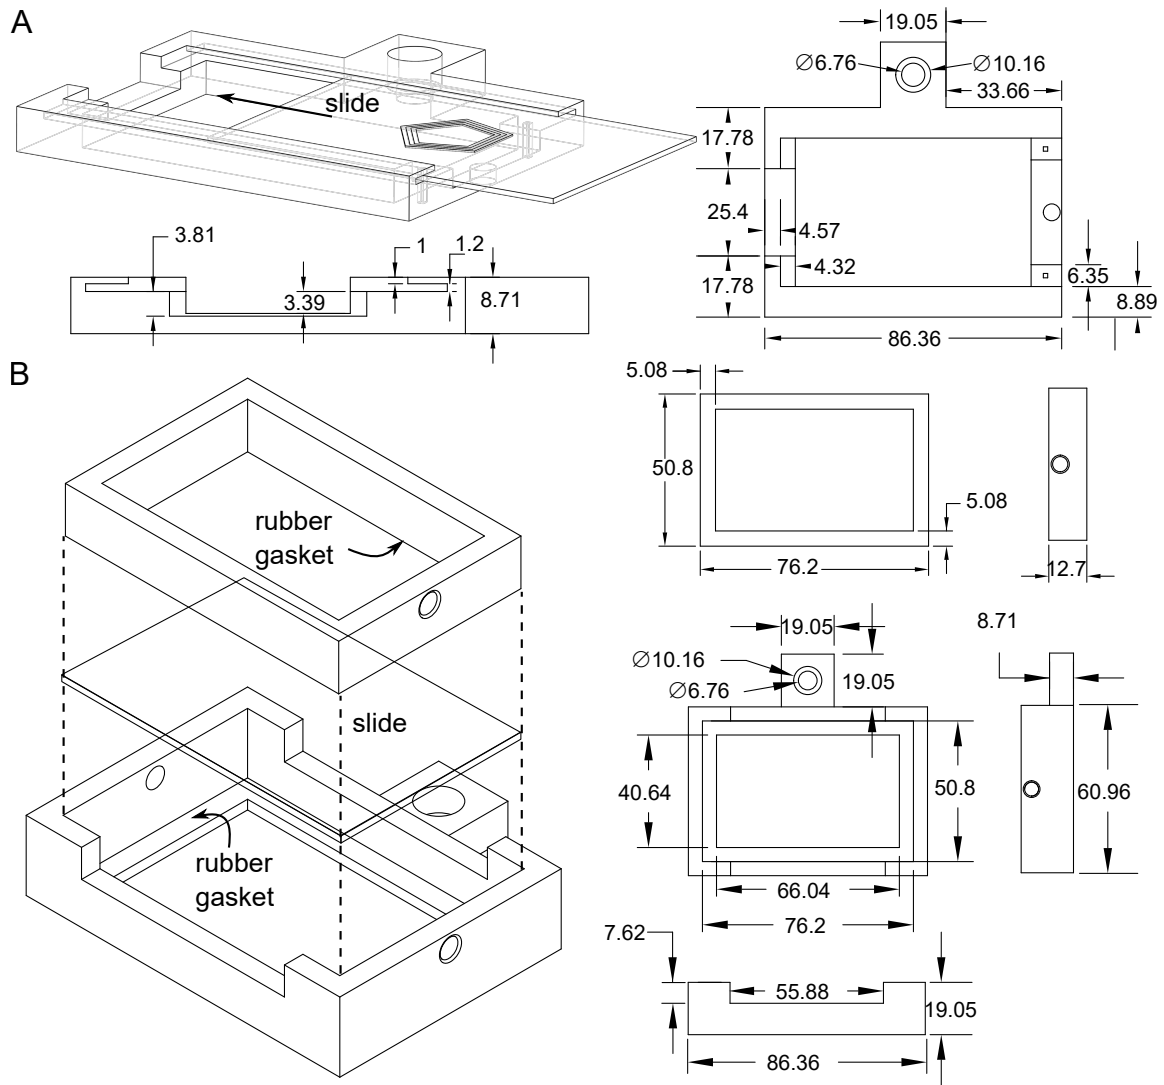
Stage assembly. Dimensions of adapters are shown in mm. A printed polygon is shown on the stage.
